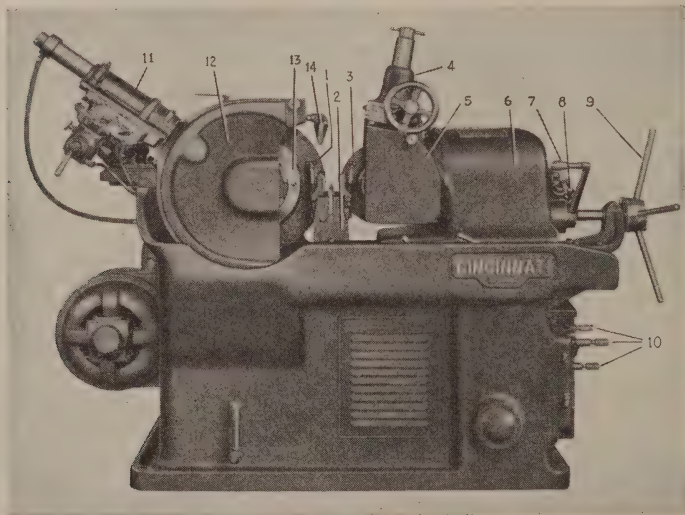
Centerless grinding machine. (Courtesy of Cincinnati Milling Machine and Cincinnati Grinders Incorporated.)
